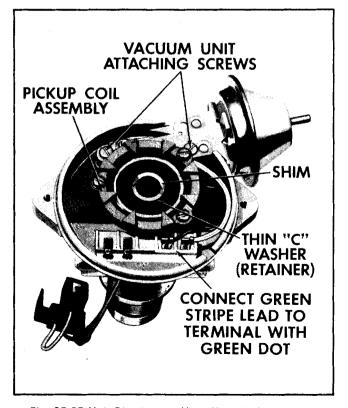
E-65 Unit Distributor - Unit With Shaft Assembly Removed
